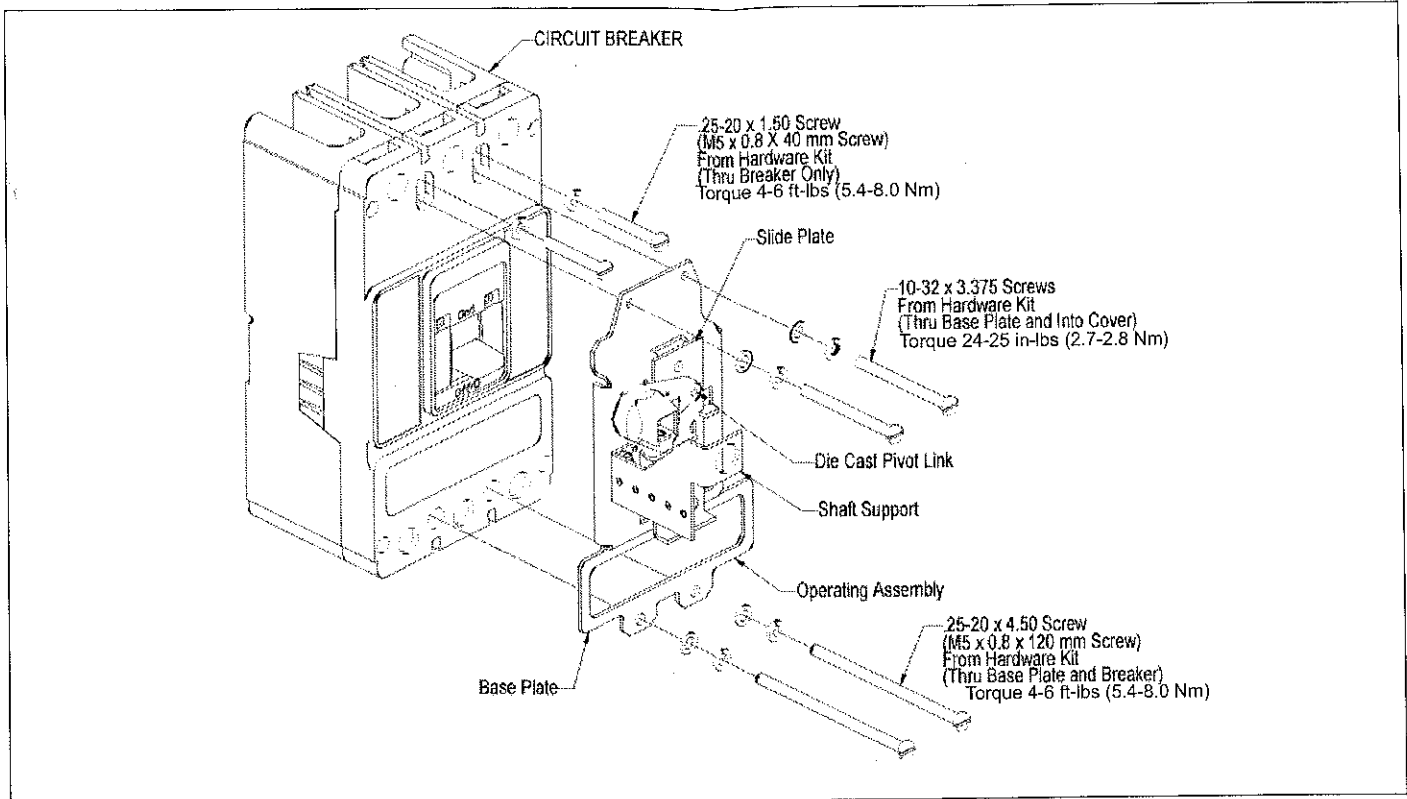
K-Frame Breaker/Mechanism Assembly
